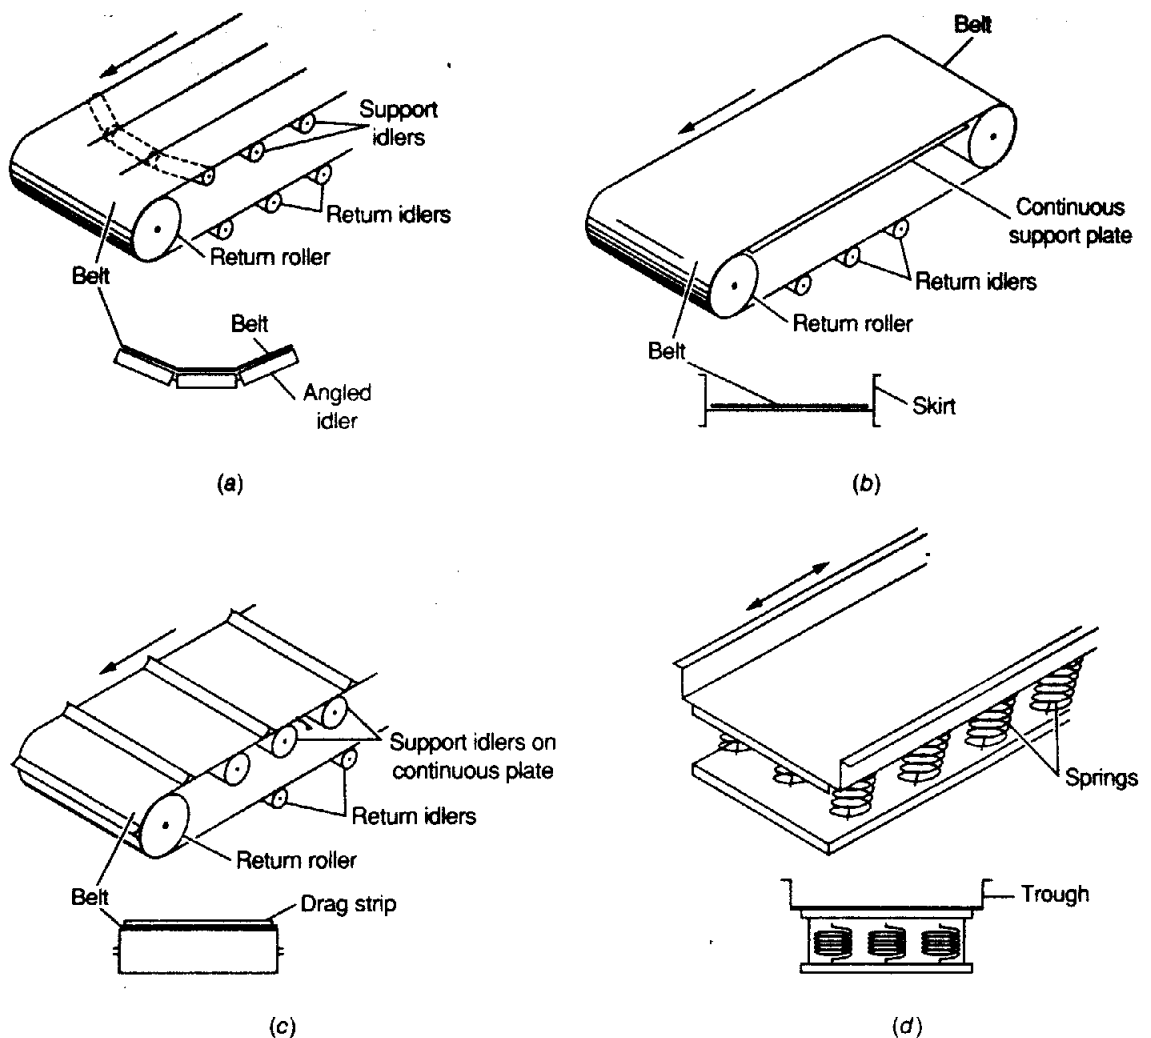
Conveyor belts used to transport solid waste: (a) troughed belt on angled idlers, (b) flat belt on continuous plate, (c) drag conveyor on idlers, and (d) mechanical vibrating conveyor.
